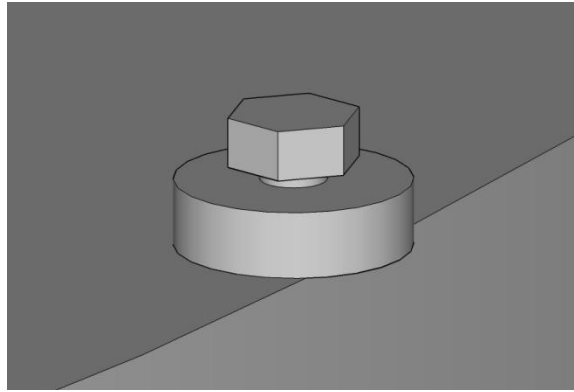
Skirt XY (Horizontal) Plane Bearing Closeup
